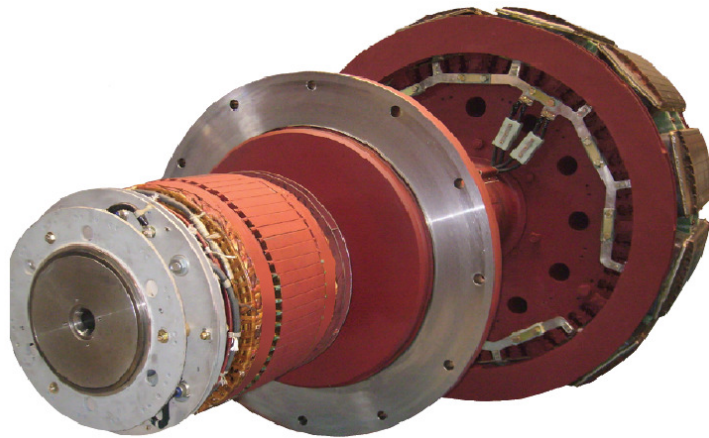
9 The anatomy of the rotor with shaft-mounted out board exciter, [28, 29,]
